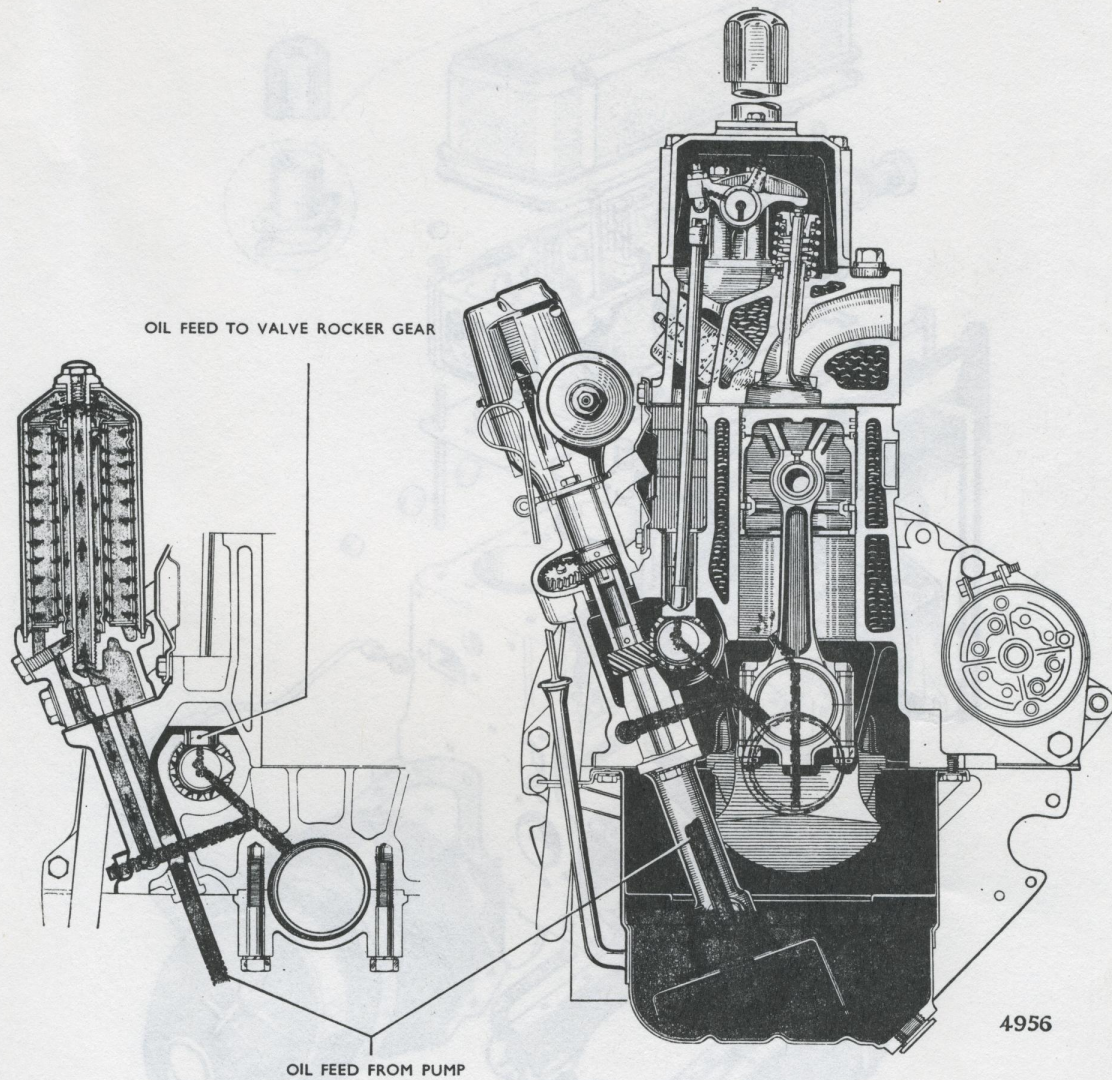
Engine—Cross section (1494 c.c. engine shown)
